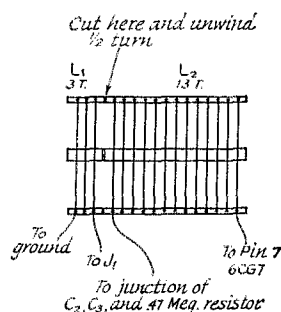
Drawing of the L_1L_2 coil assembly. The assembly is made from a single length of B & W Miniductor coil stock type 3007, $\frac{1}{8}$ -inch diameter, 16 turns per inch, No. 20.
